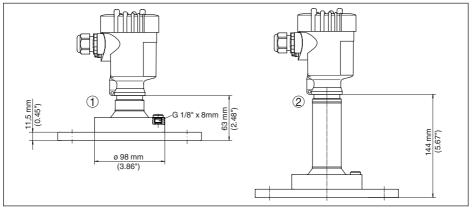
VEGAPULS 69, metal-jacketed lens antenna. Flange thickness acc. to drawing, flange dimensions acc. to DIN/ASME/JIS.
